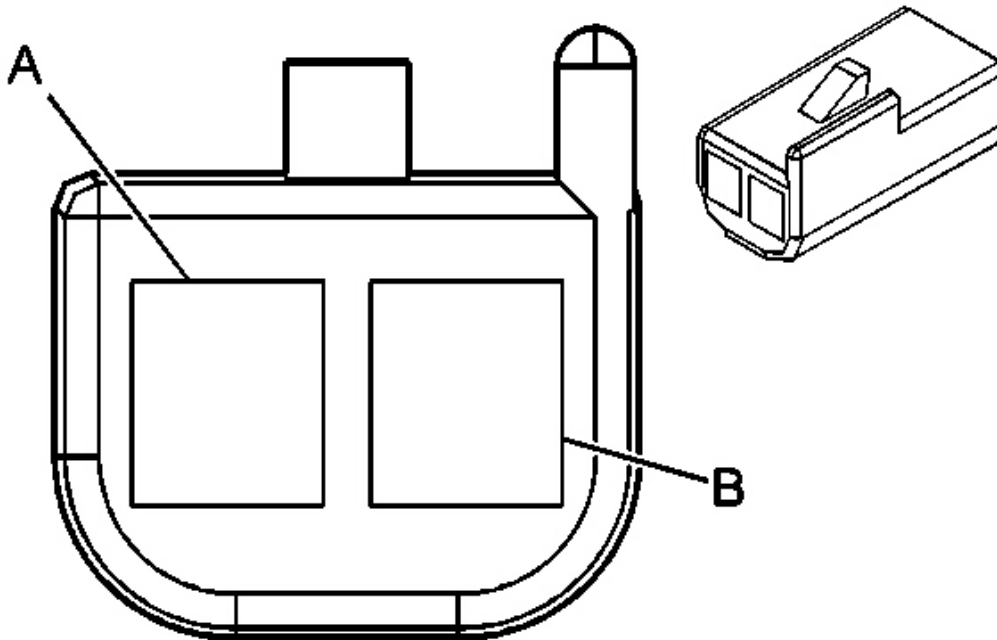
Air Temperature Sensor - Lower Left Connector End View
